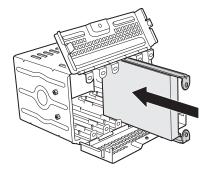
Inserting Drive/Slide Assembly into Drive Cage
